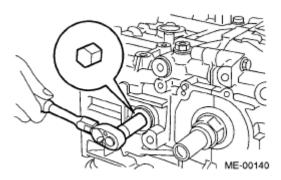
Removing Service Hole Plug Courtesy of SUBARU OF AMERICA, INC.
